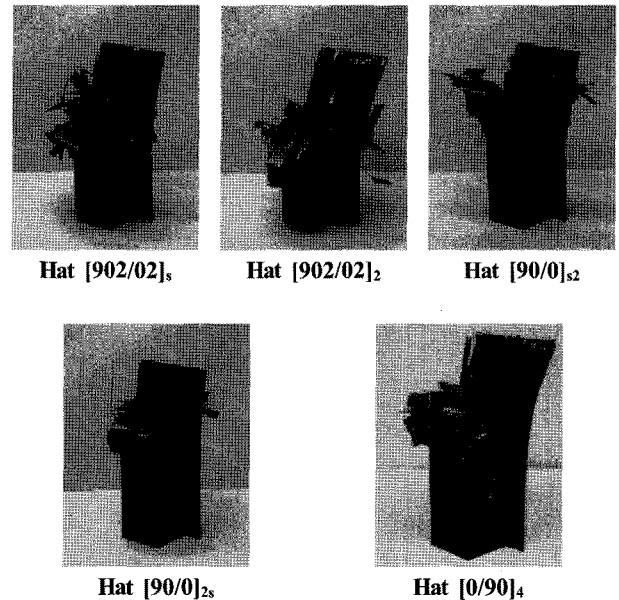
Collapse modes CFRP hat-shaped section members after impact test(outer angle 90°)
